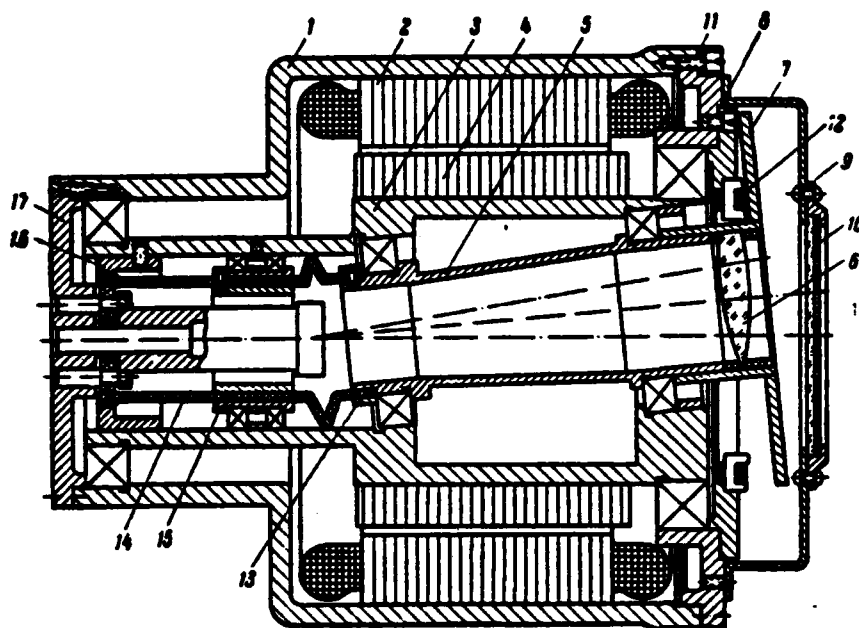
The design concept of the optical-mechanical scanning device/equipment with the flexible drive, which realizes scanning along the spiral rotational-rotational trajectory.
